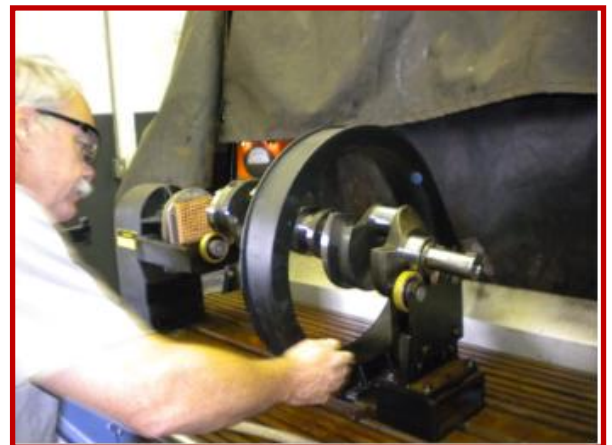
Certified Machinists conducting NDT wet magnetic particle inspection
